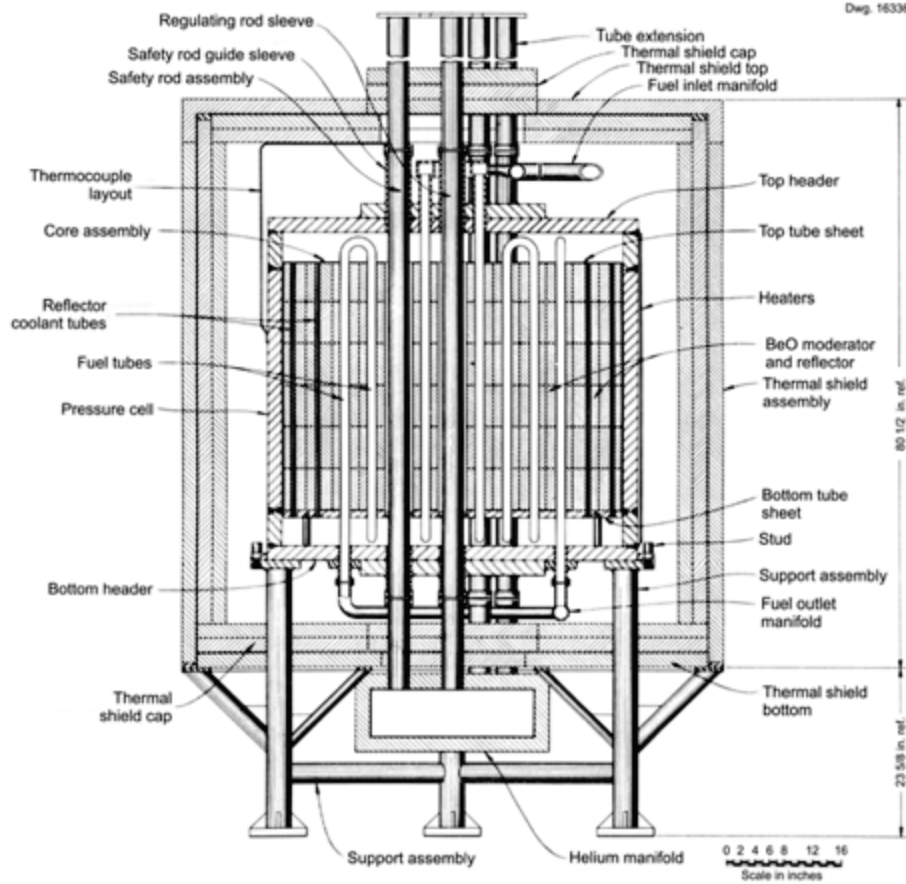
Elevation view of the ARE core. (ORNL Drawing 16336).
